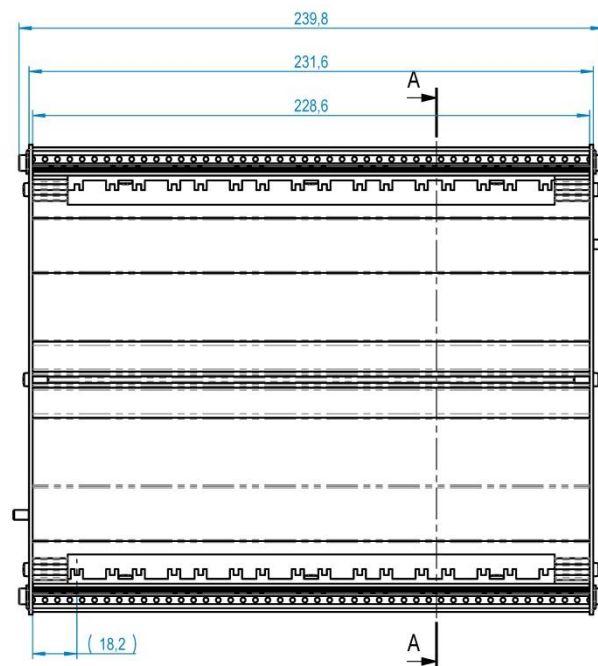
Mounting dimensions BCU-50-M DIN top-hat rail
